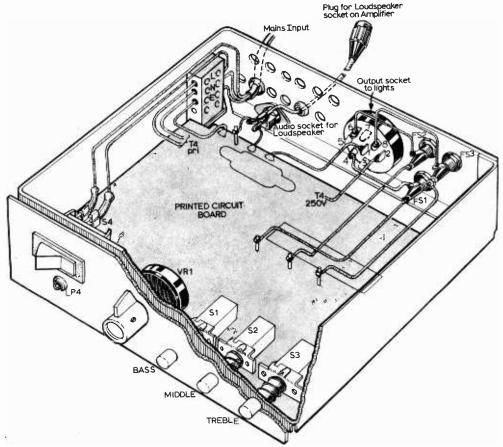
Wiring of chassis mounted components to the printed circuit board. Tag 1 on the lights output socket goes to chassis (and mains earth). The live lead (L) from the mains terminal block goes to the 250V tag on T4 transformer.
